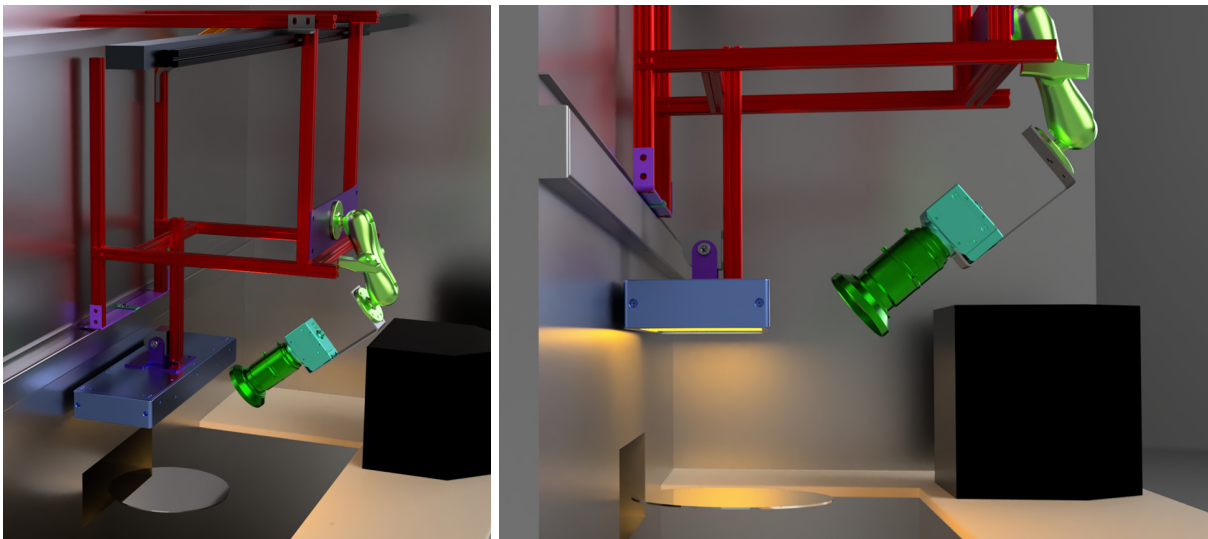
In-line inspection TEL mounts [35]: CAD rendering of inline inspection mount as installed in a tool.
